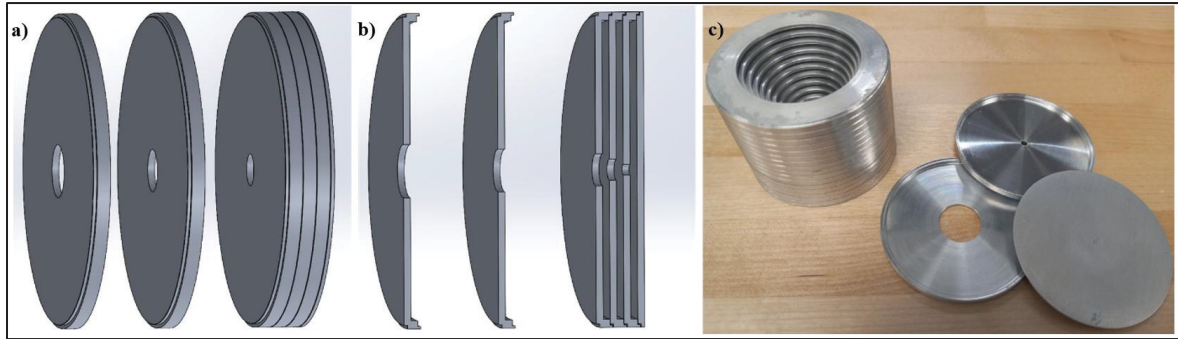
Design of the manufactured technical solution: a) 3D global view and b) 3D cross-section of the modelling of single and assembled parts; c) picture of single and assembled parts machined in aluminum
